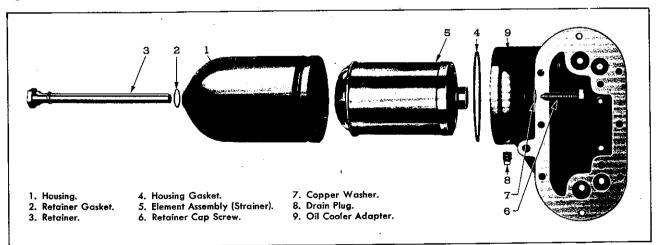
Lubrication Oil Strainer Details and Relative Location of Parts.
